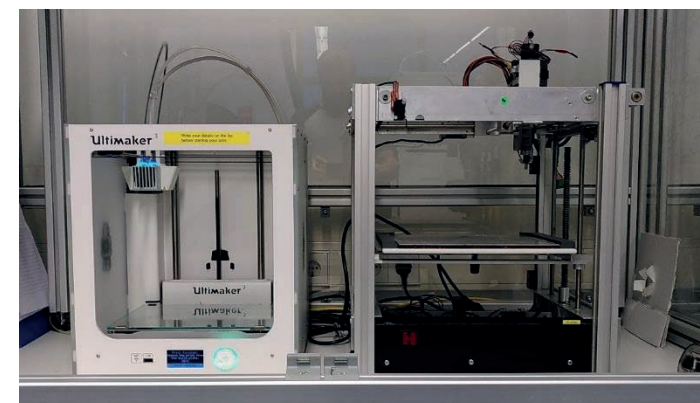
The Ultimaker 3 (left) for thermoplastic extrusion and the DIY printer (right) for solder paste extrusion and curing.
